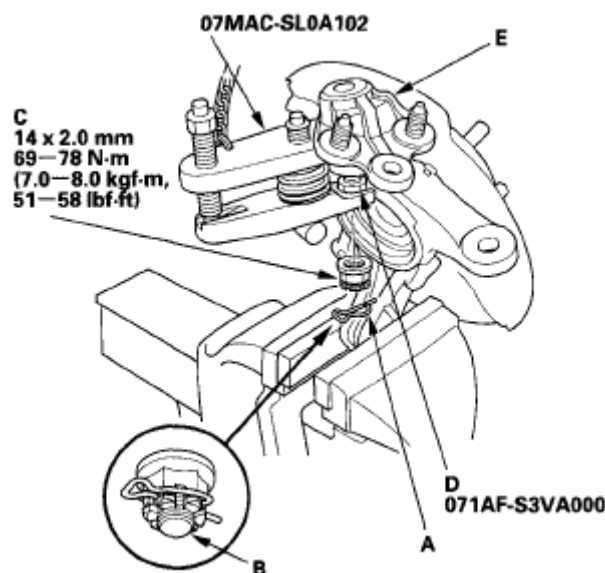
Identifying Lower Ball Joint Pin (With Torque Specifications)
